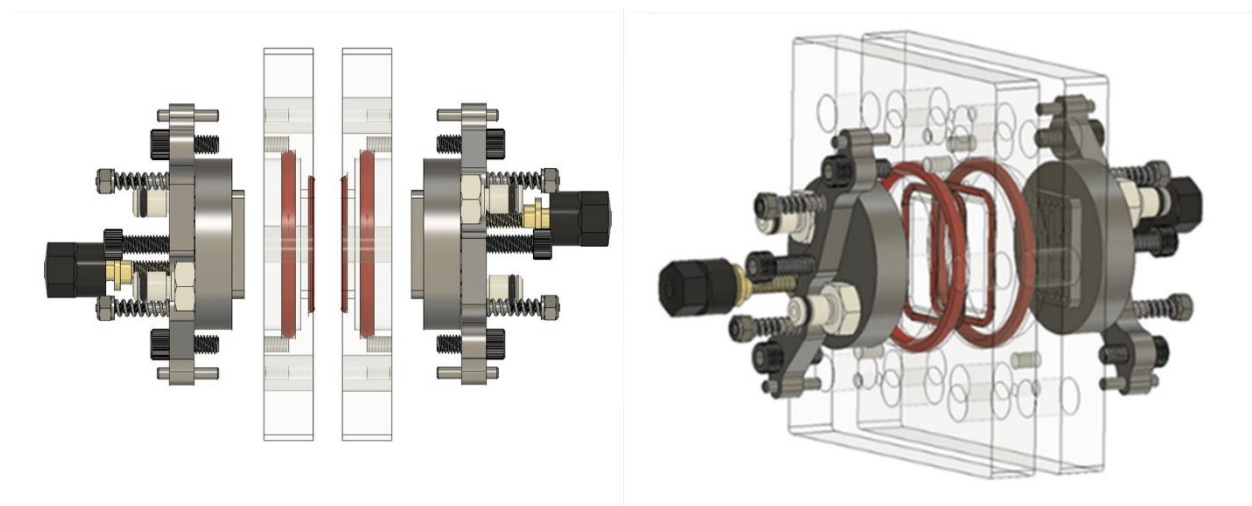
3D CAD drawing of electrolyzer, side view (left); CAD drawing of electrolyzer, isometric view (right); (CAD drawings courtesy of Nicholas Lombardo)
